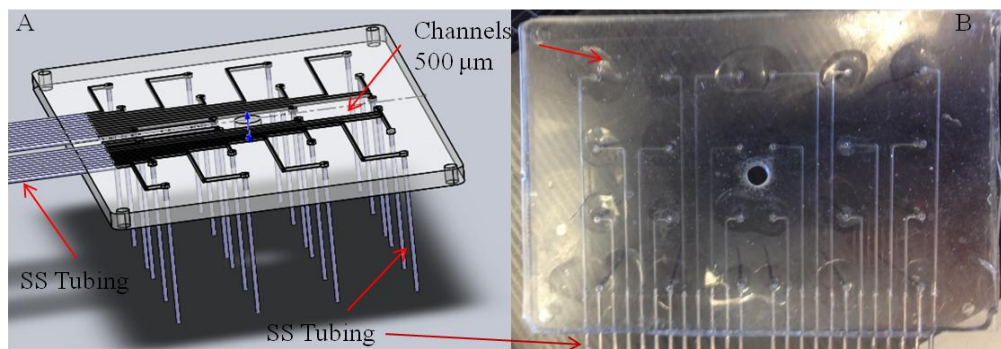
Piece resulting from the PDMS casting in modular mold. SolidWorks® model of the final product of the stereolithography (isometric view) (A). Picture of the actual *fluid-exchange layer* after PDMS casting (B).
